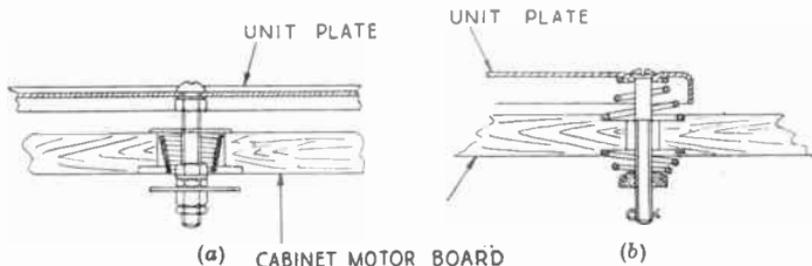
SUSPENSION SPRINGS: (a) TENSION TYPE; (b) COMPRESSION TYPE.
